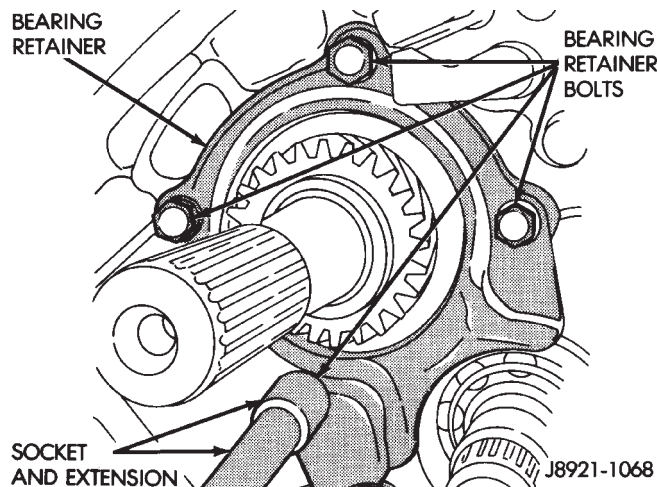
Remove Output Shaft Rear Bearing Retainer Bolts
